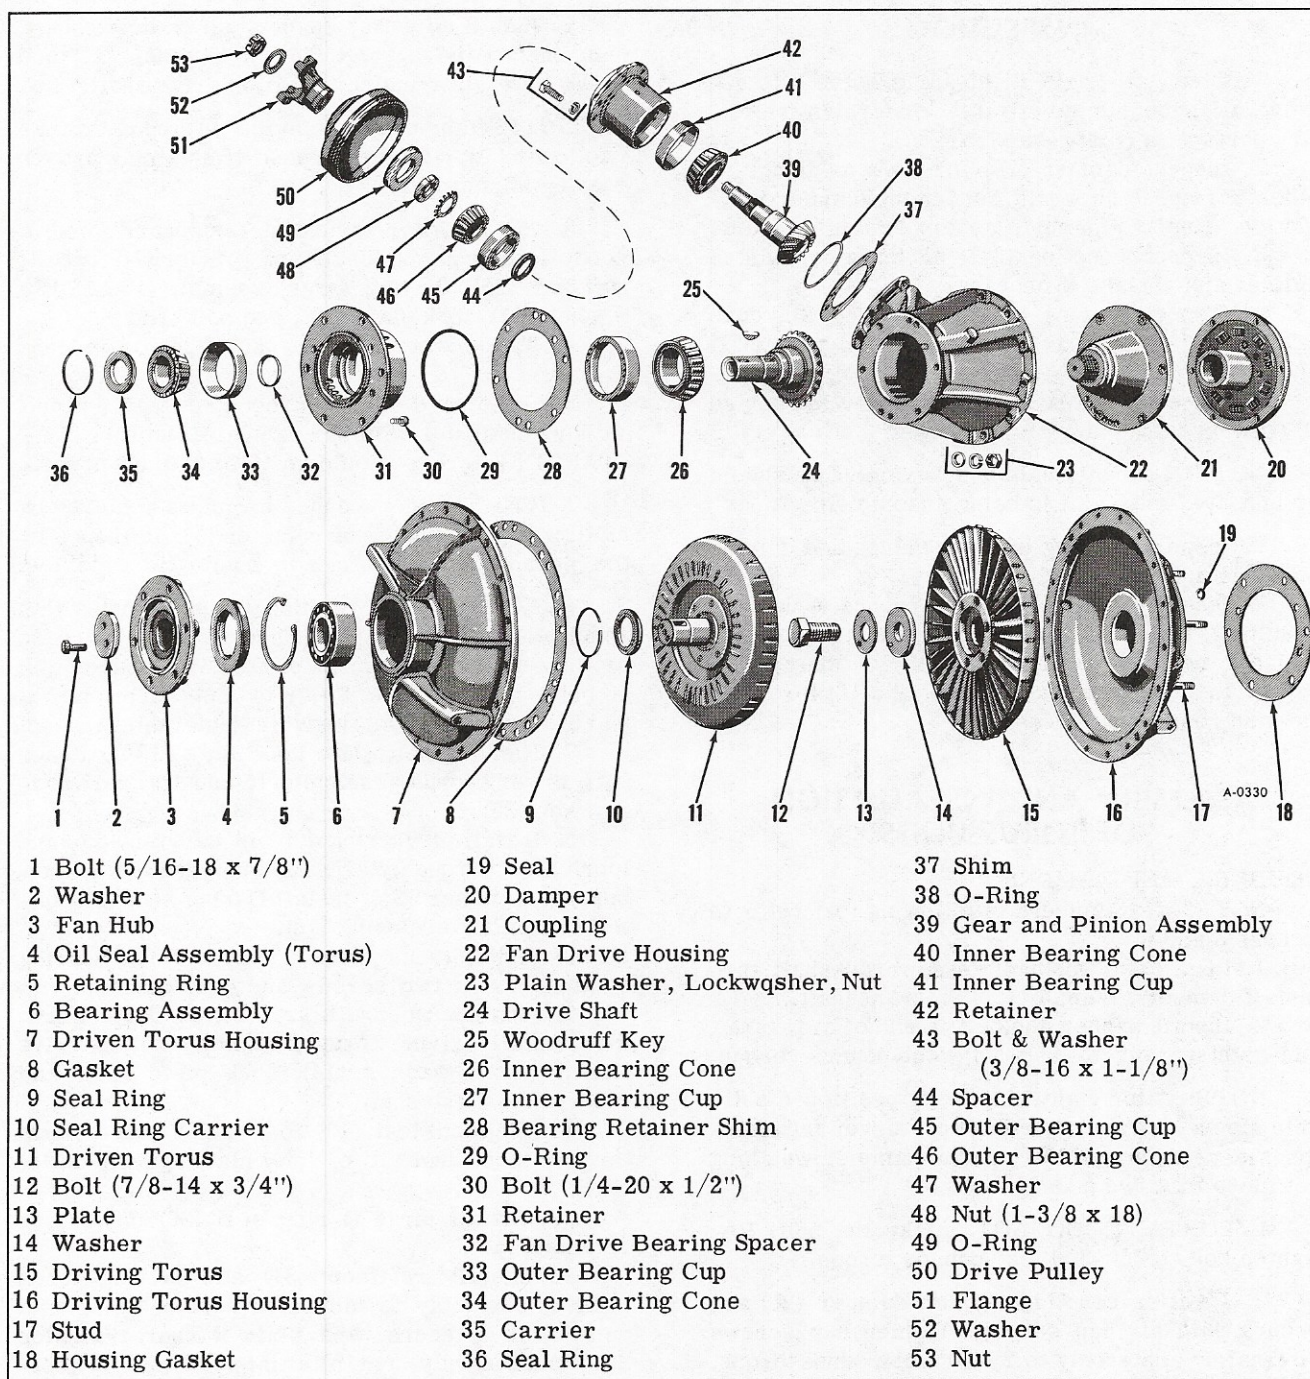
Fluid Fan Drive Components (With Air Conditioning) (Typical)
